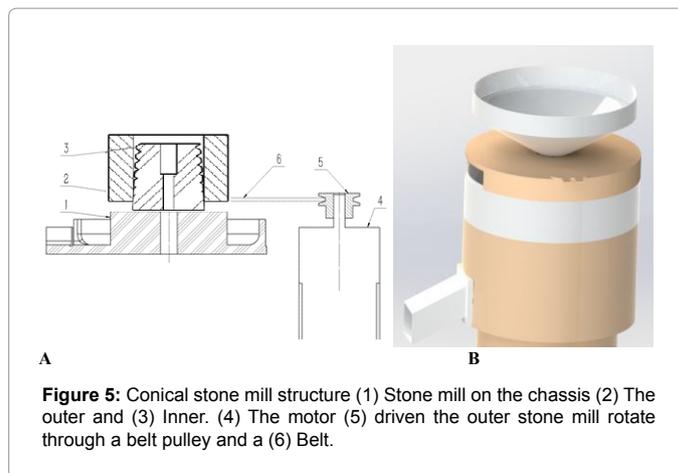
Conical stone mill structure (1) Stone mill on the chassis (2) The outer and (3) Inner. (4) The motor (5) driven the outer stone mill rotate through a belt pulley and a (6) Belt.
